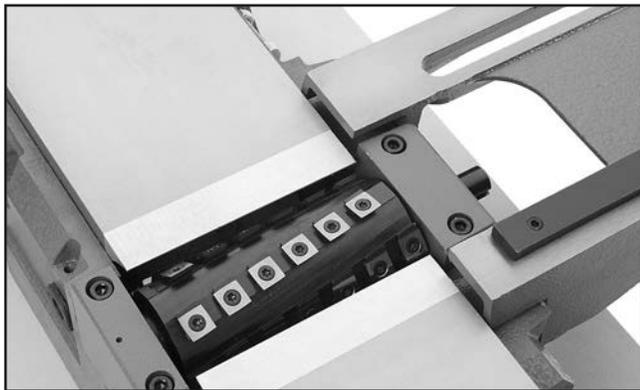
Example picture of spiral cutterhead installed (T27449 not shown).
